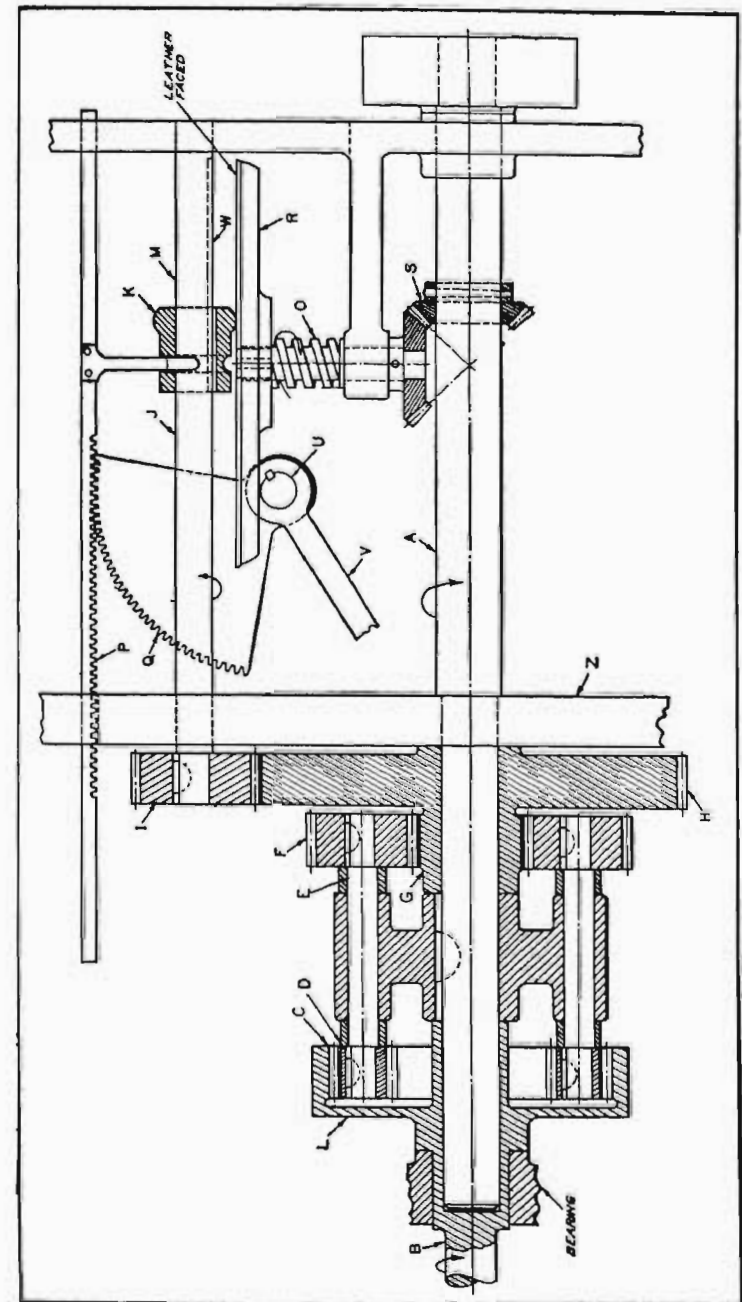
Mechanism for Varying Speed of Driven Shaft Using Rock Controlled Friction Drive.
